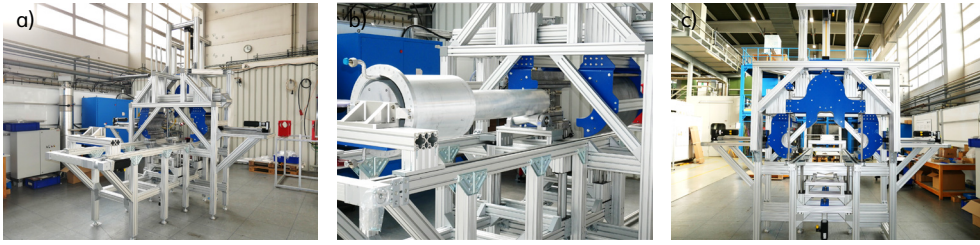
Picture of the partially assembled target extraction tool: a) isometric view; b) prototype with target plug and target; c) back view
